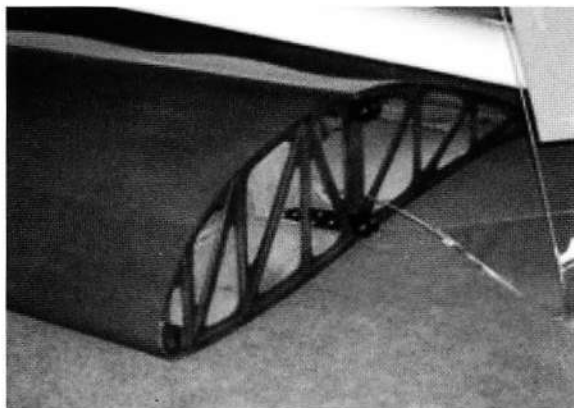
Root-nose section of a *Vampyr* wing (Rebuild in Wasserkuppe-Museum)
